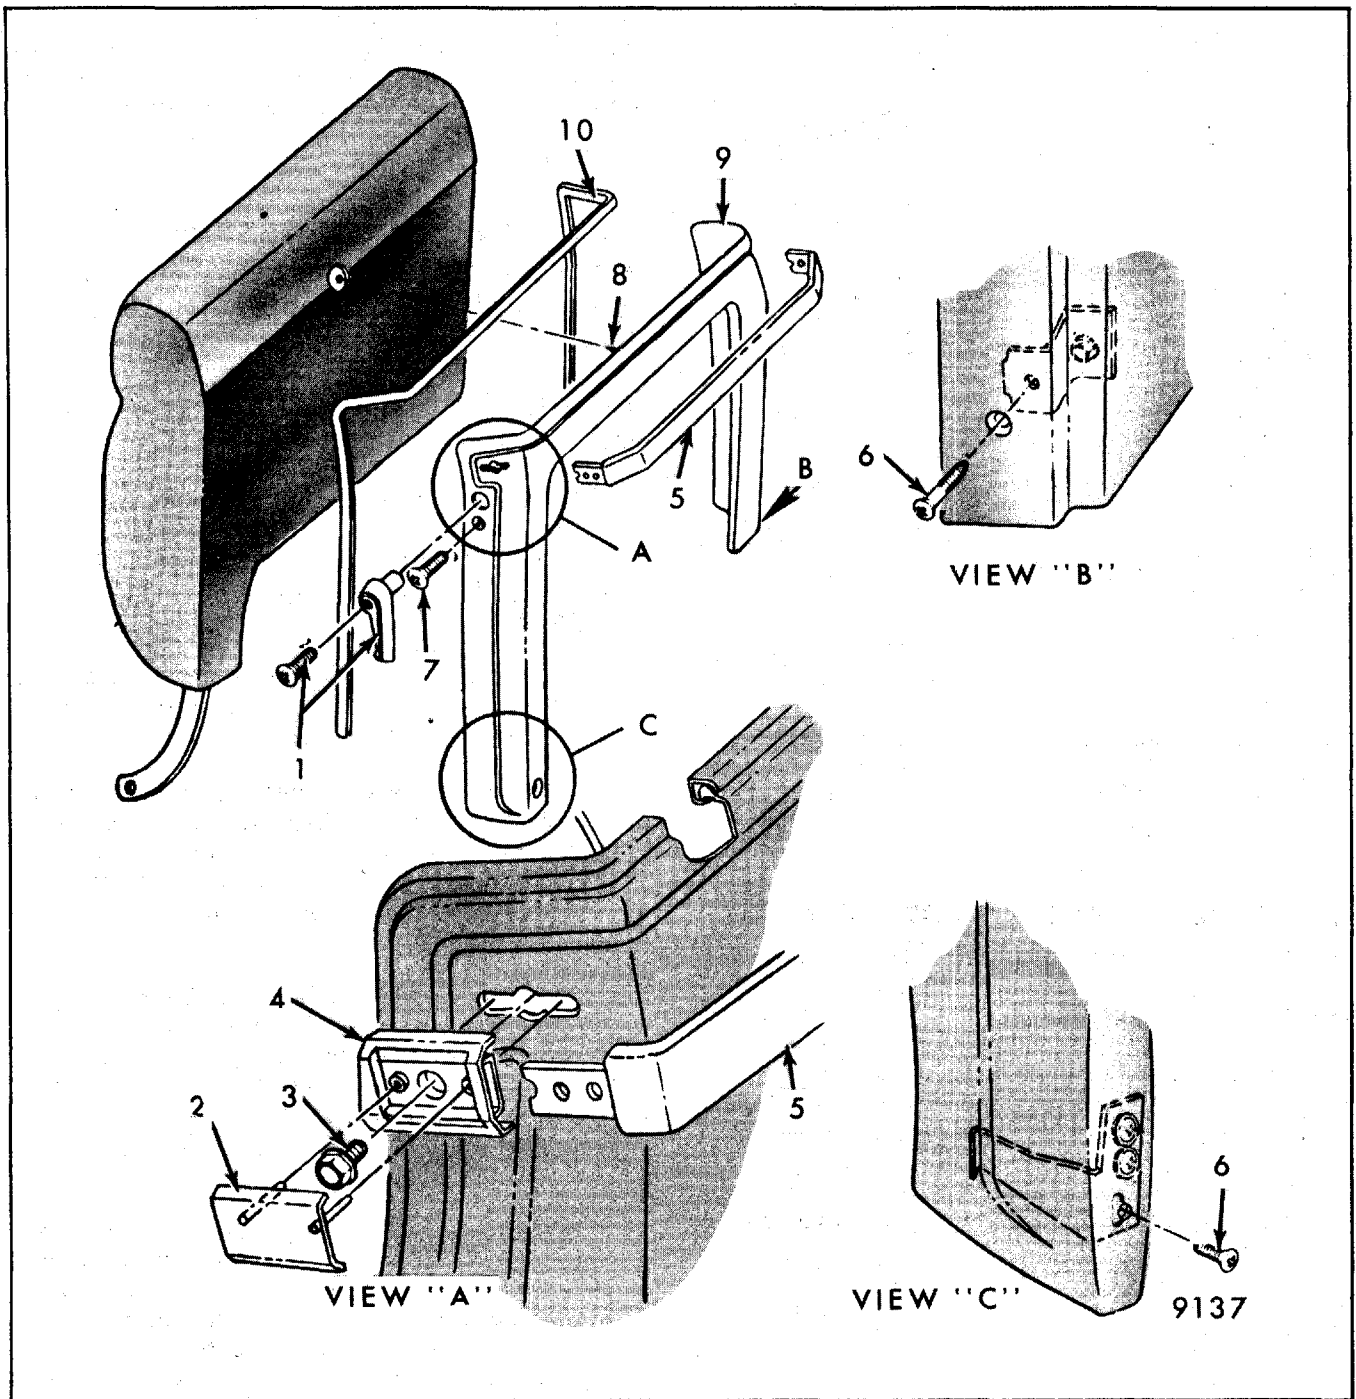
Front Seat Back Assist Strap and Panel Assembly - Cadillac Eldorado
